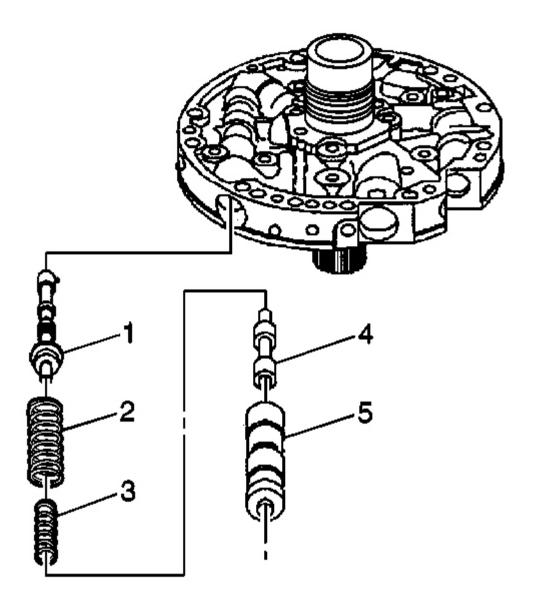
Identifying Pressure Regulator Valve Courtesy of GENERAL MOTORS CORP.
